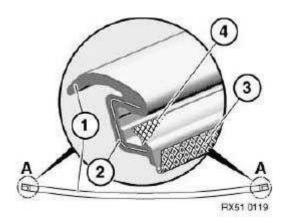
Identifying Rubber Frame And Aluminum Strip Courtesy of BMW OF NORTH AMERICA, INC.
